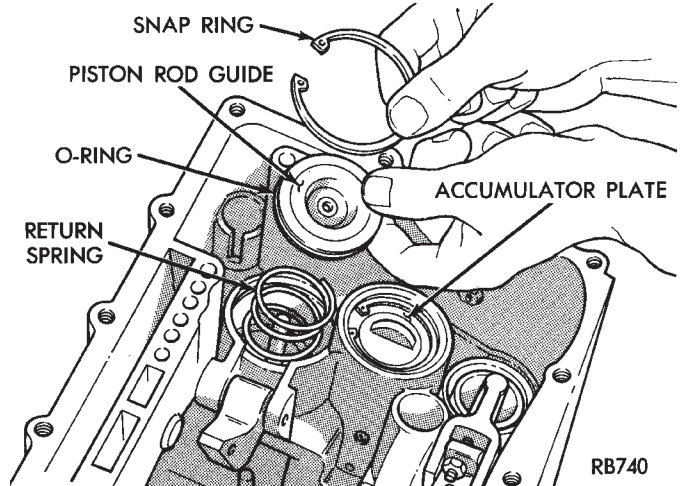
Kickdown Servo Rod Guide and Snap Ring
